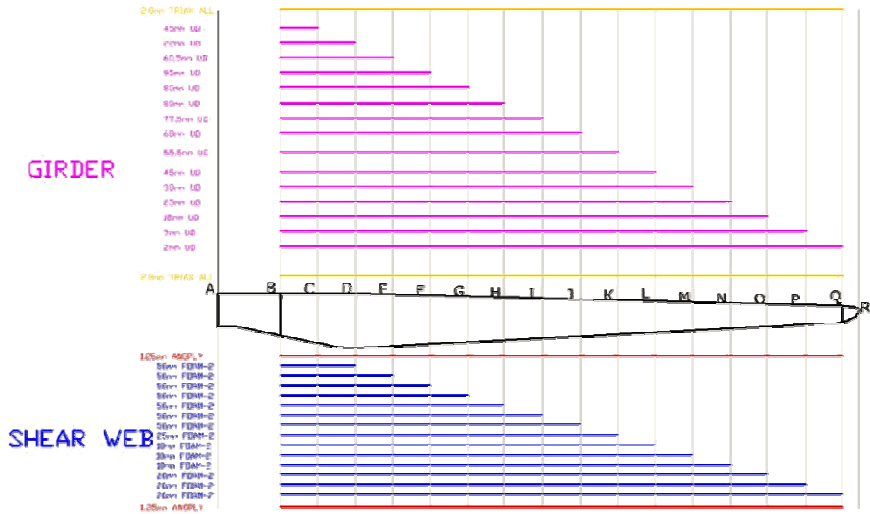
Material lay-up configuration for the girder box-section composite beam
